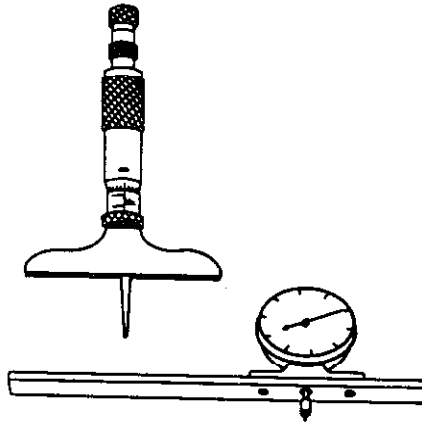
Depth micrometer modified with tapered depth probe (above), and depth dial micrometer modified with tapered depth probe and extended shoulder (below).
